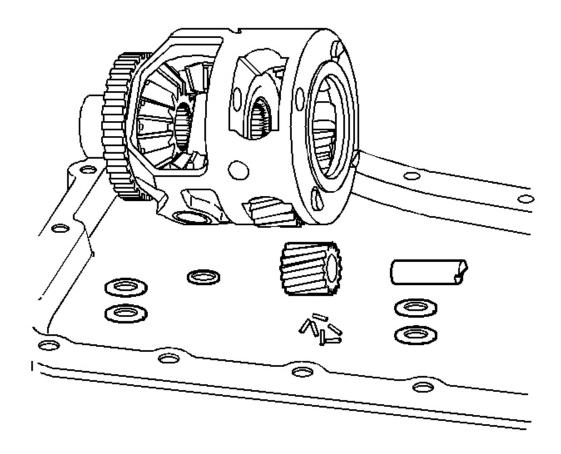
Ensuring Containment Of Final Drive Carrier Components Courtesy of GENERAL MOTORS CORP.
